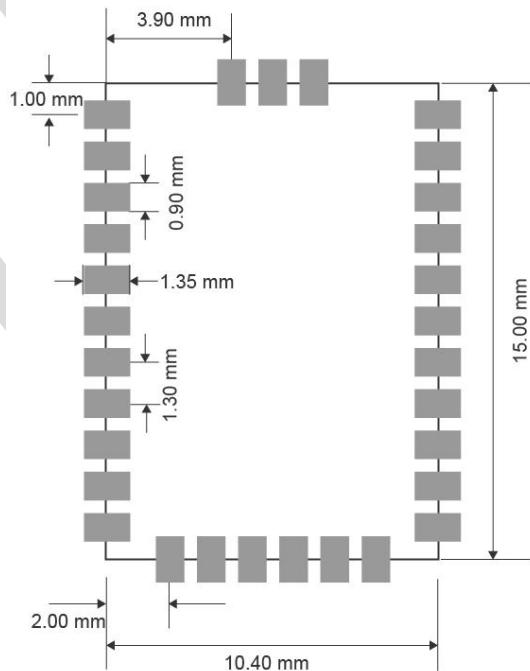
Recommended PCB Footprint of CB1730-Q31P
